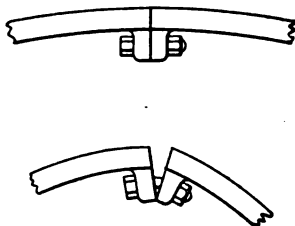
Manner in which Bolts in Fly-wheel Joints are Stressed
